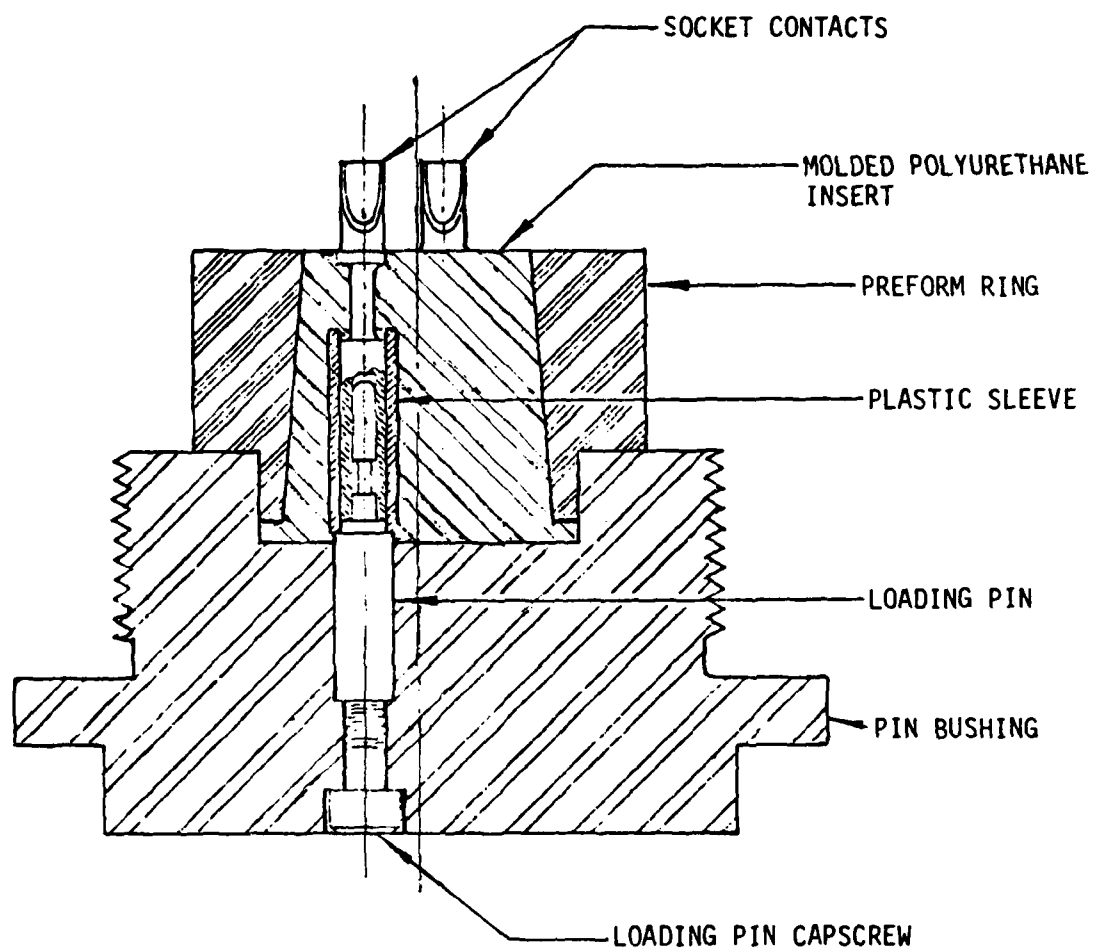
MIL-C-24231 PLUG INSERT MOLD
